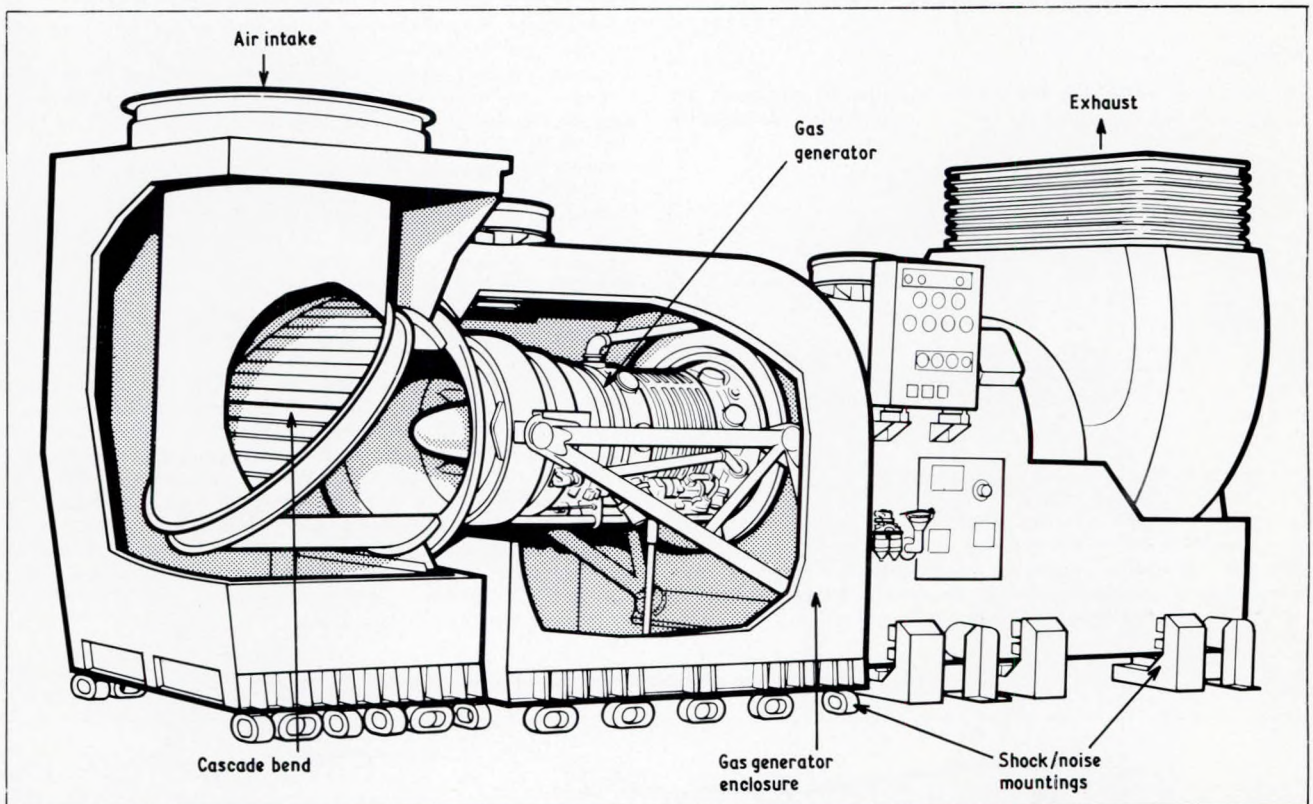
The complete marine Olympus assembly, showing the intake cascade bend, the gas generator mounting arrangement and enclosure which reduces noise and the escape of heat into the engine room
